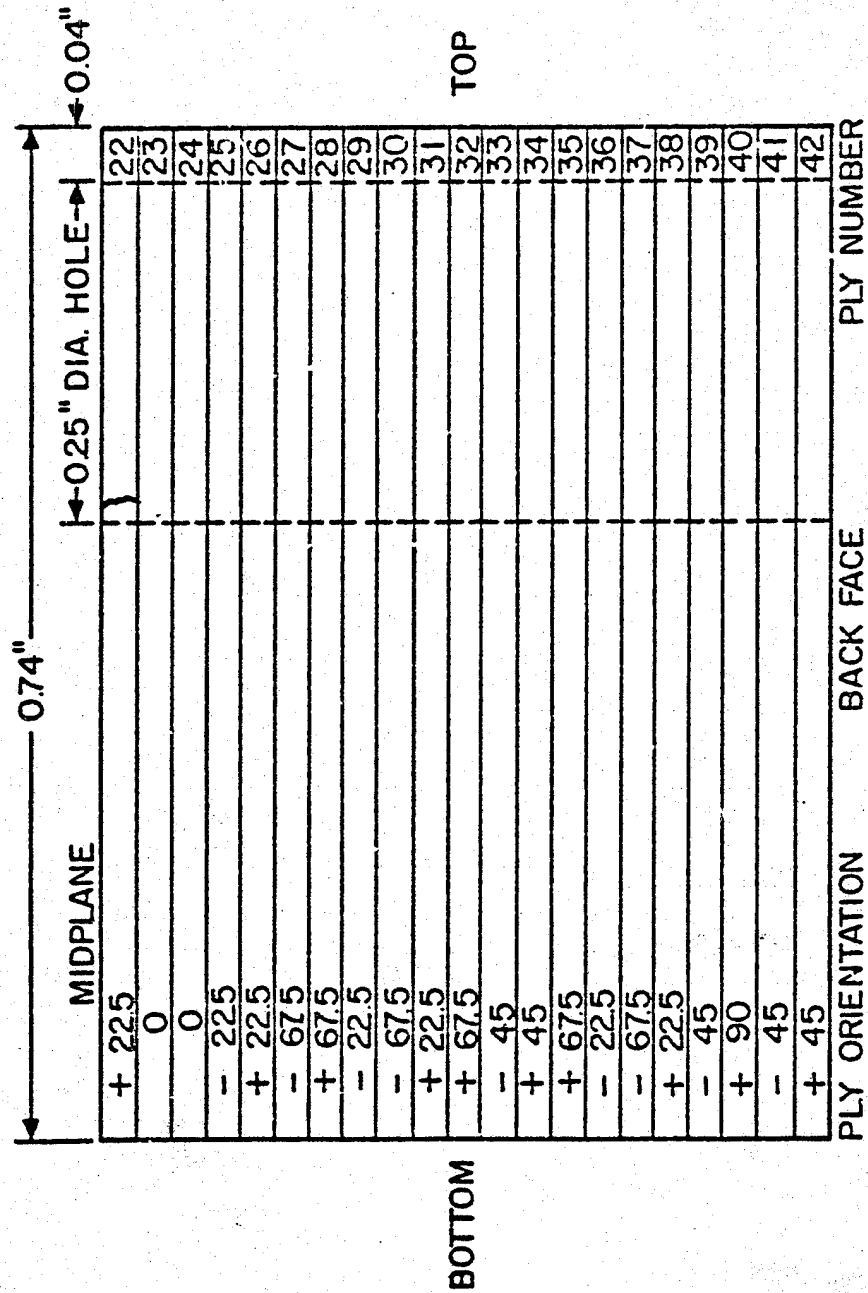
B. The second longitudinal section of specimen 1C2 (42 ply) showing damage detail.
